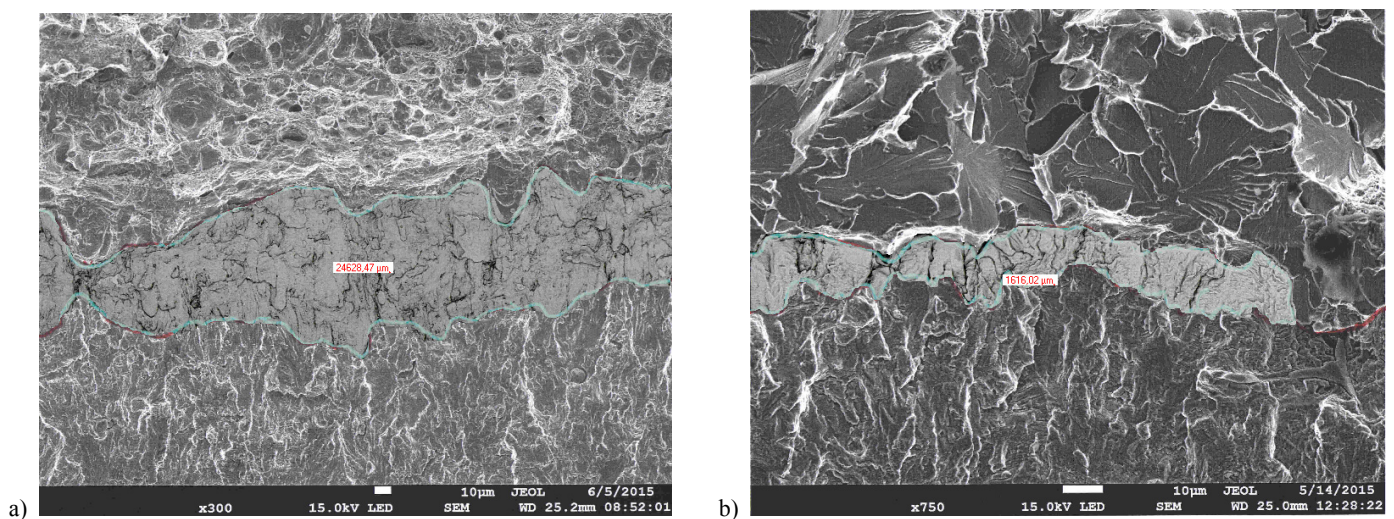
The morphology of fracture surface in the top of crack-the SZW and crack propagate aria for 20°C (a) and - 60°C (b) in the modified G17CrMo5-5 cast steel
